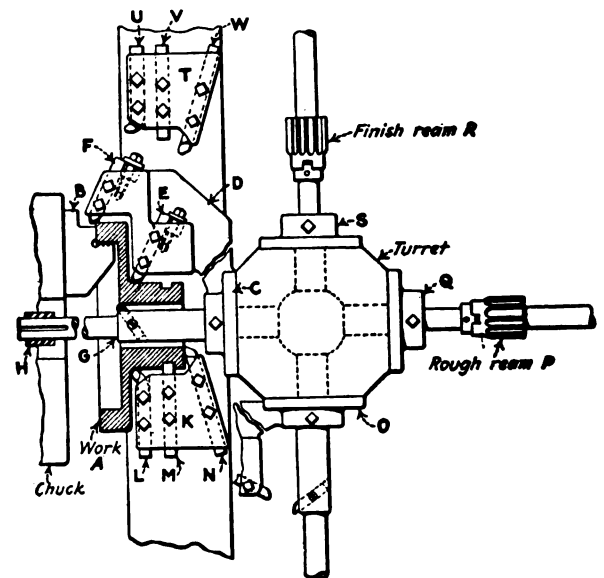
TURRET LAYOUT FOR MACHINE WITH FOUR-SIDED TURRET
